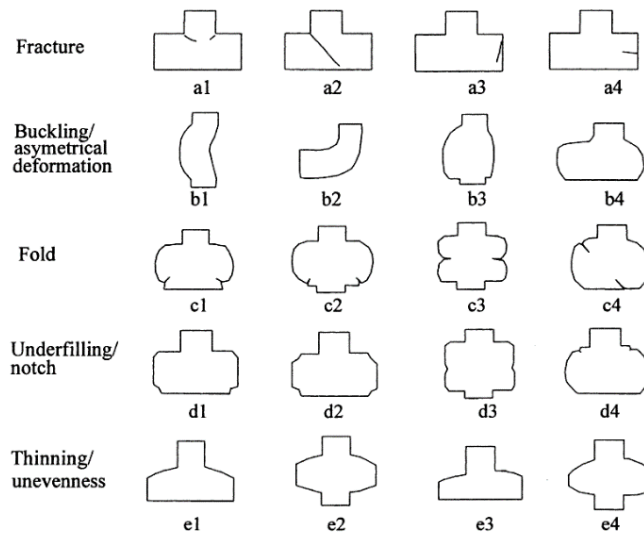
Classification of failure forms on injection forging of bulk materials [33].
